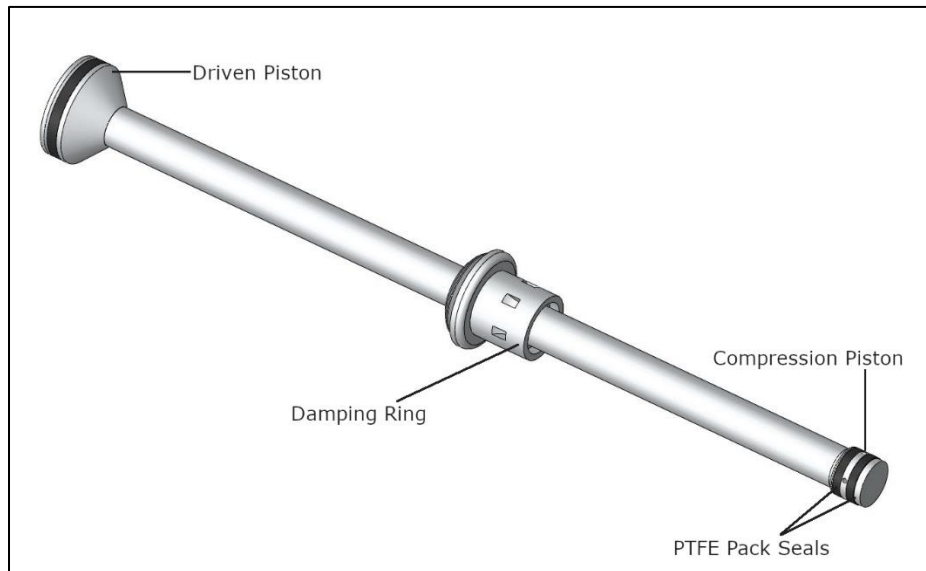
A 3D schematic of the University of Leeds RCM piston rod assembly. Adapted from [245].
